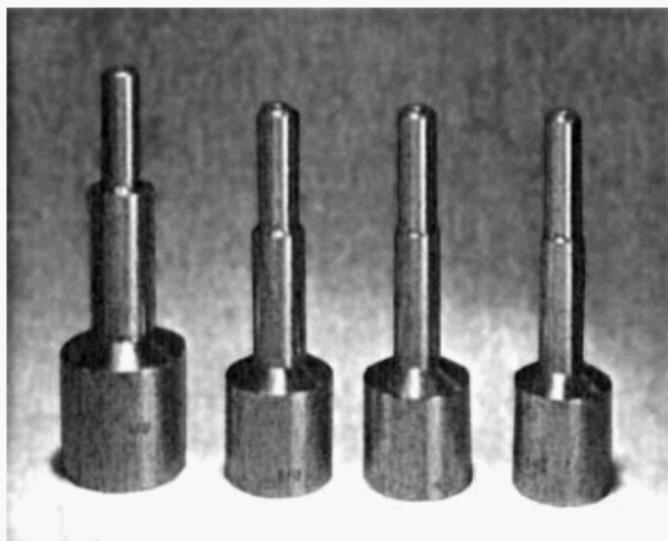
Type III Plain Stud-Shrouded Compression Ferrule
